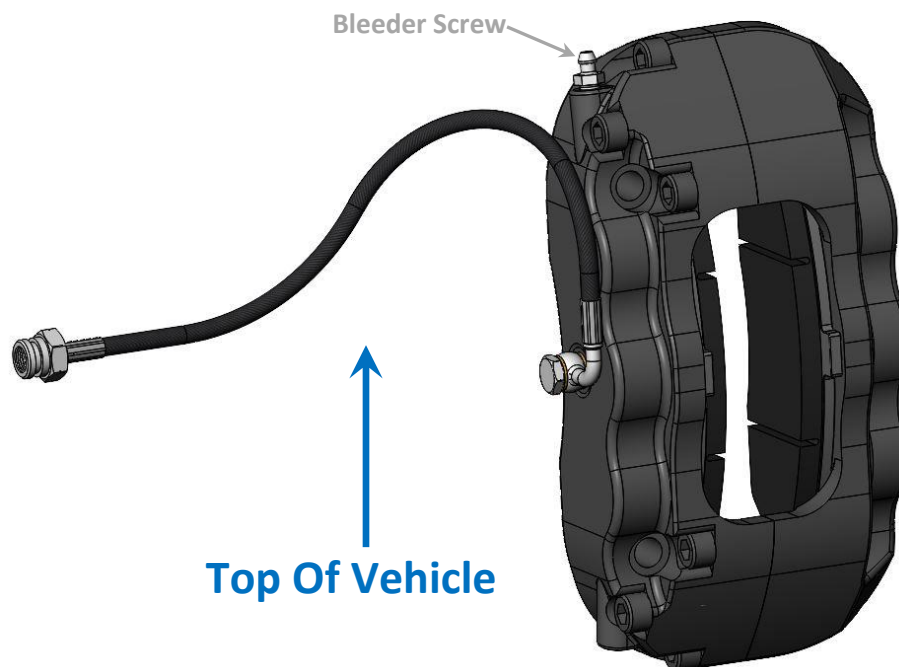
Stainless Steel Braided Hose Properly Installed (RH Shown)
